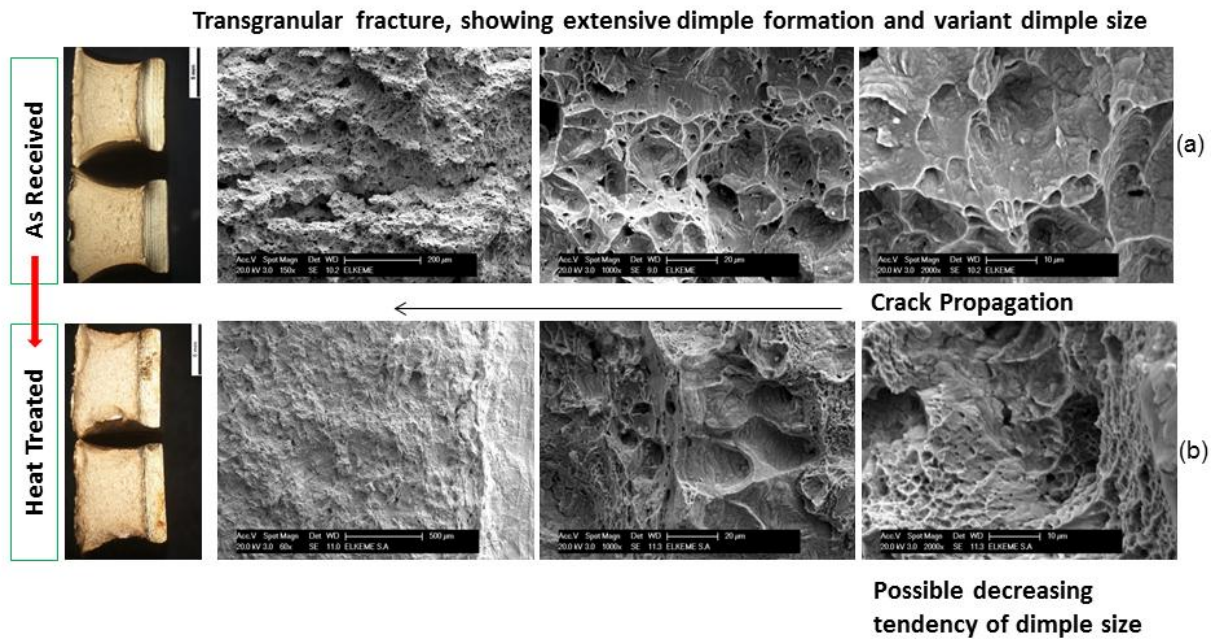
Fractographic evaluation of CW510L impact fractures: (a) as received and (b) after heat treatment.
